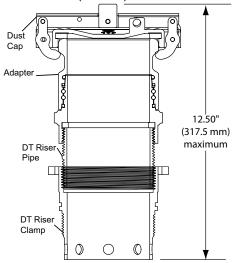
Drop Tube (DT) Riser Clamp Assembly Dimensions
